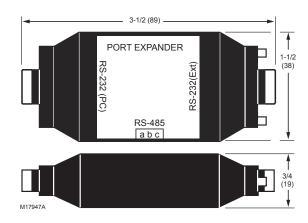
32005354-001 Port Expander dimensions in in. (mm).
